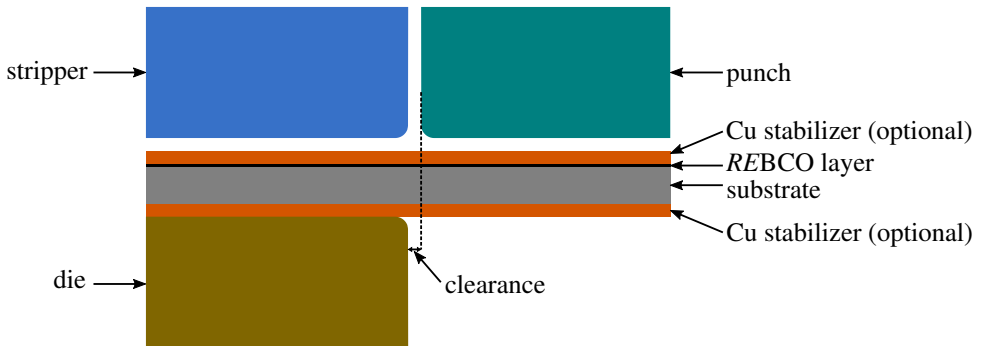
Cross-sectional view of the core of a punching tool with a *REBCO* coated conductor. The buffer stack and silver layer in the coated conductor are omitted for clarity.
